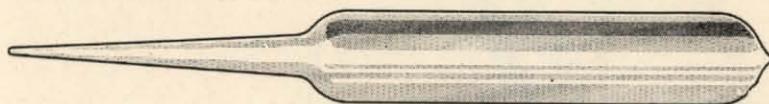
TUBE READY FOR JOINING OPERATION
